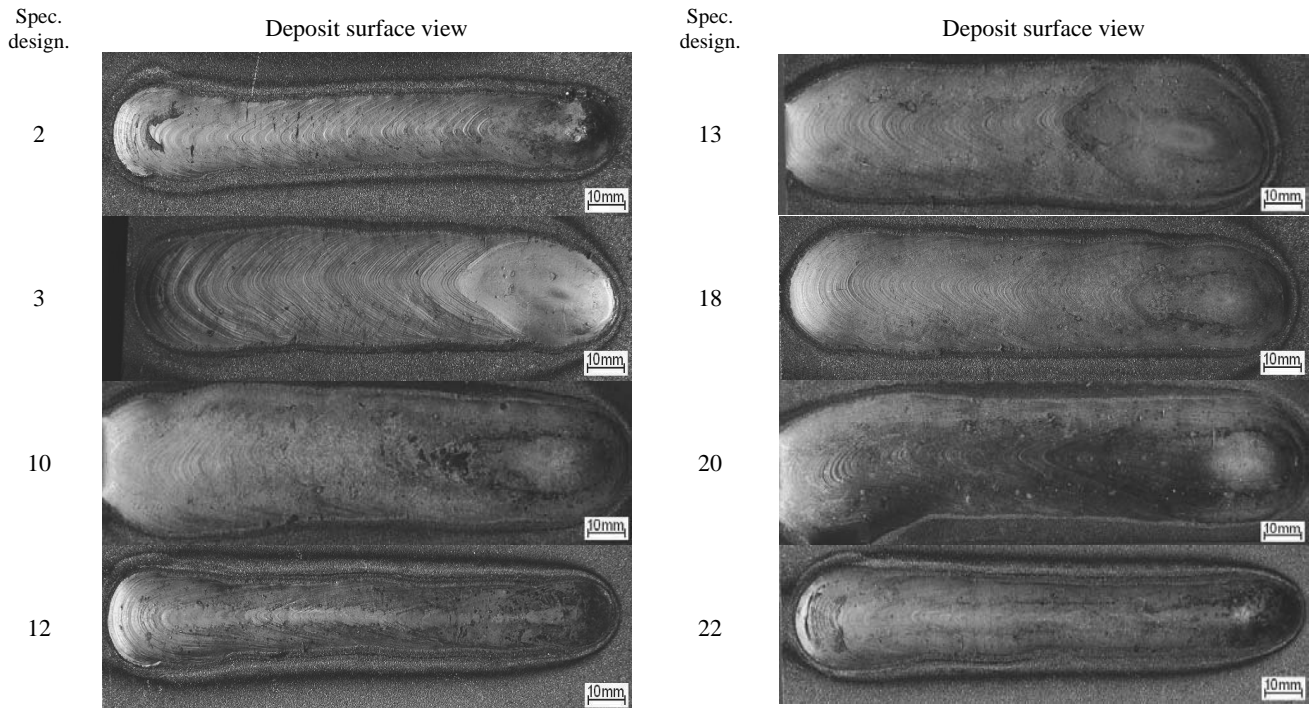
SAW deposits face view surfaced with 00H18M2Nb wire on S355NL steel plates, Table 3
